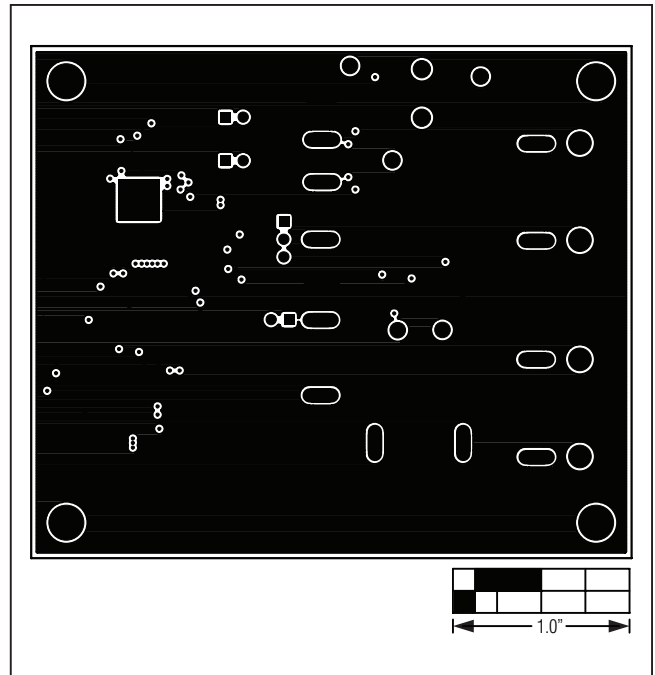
MAX97003 EV Kit PCB Layout—GND Layer 5
